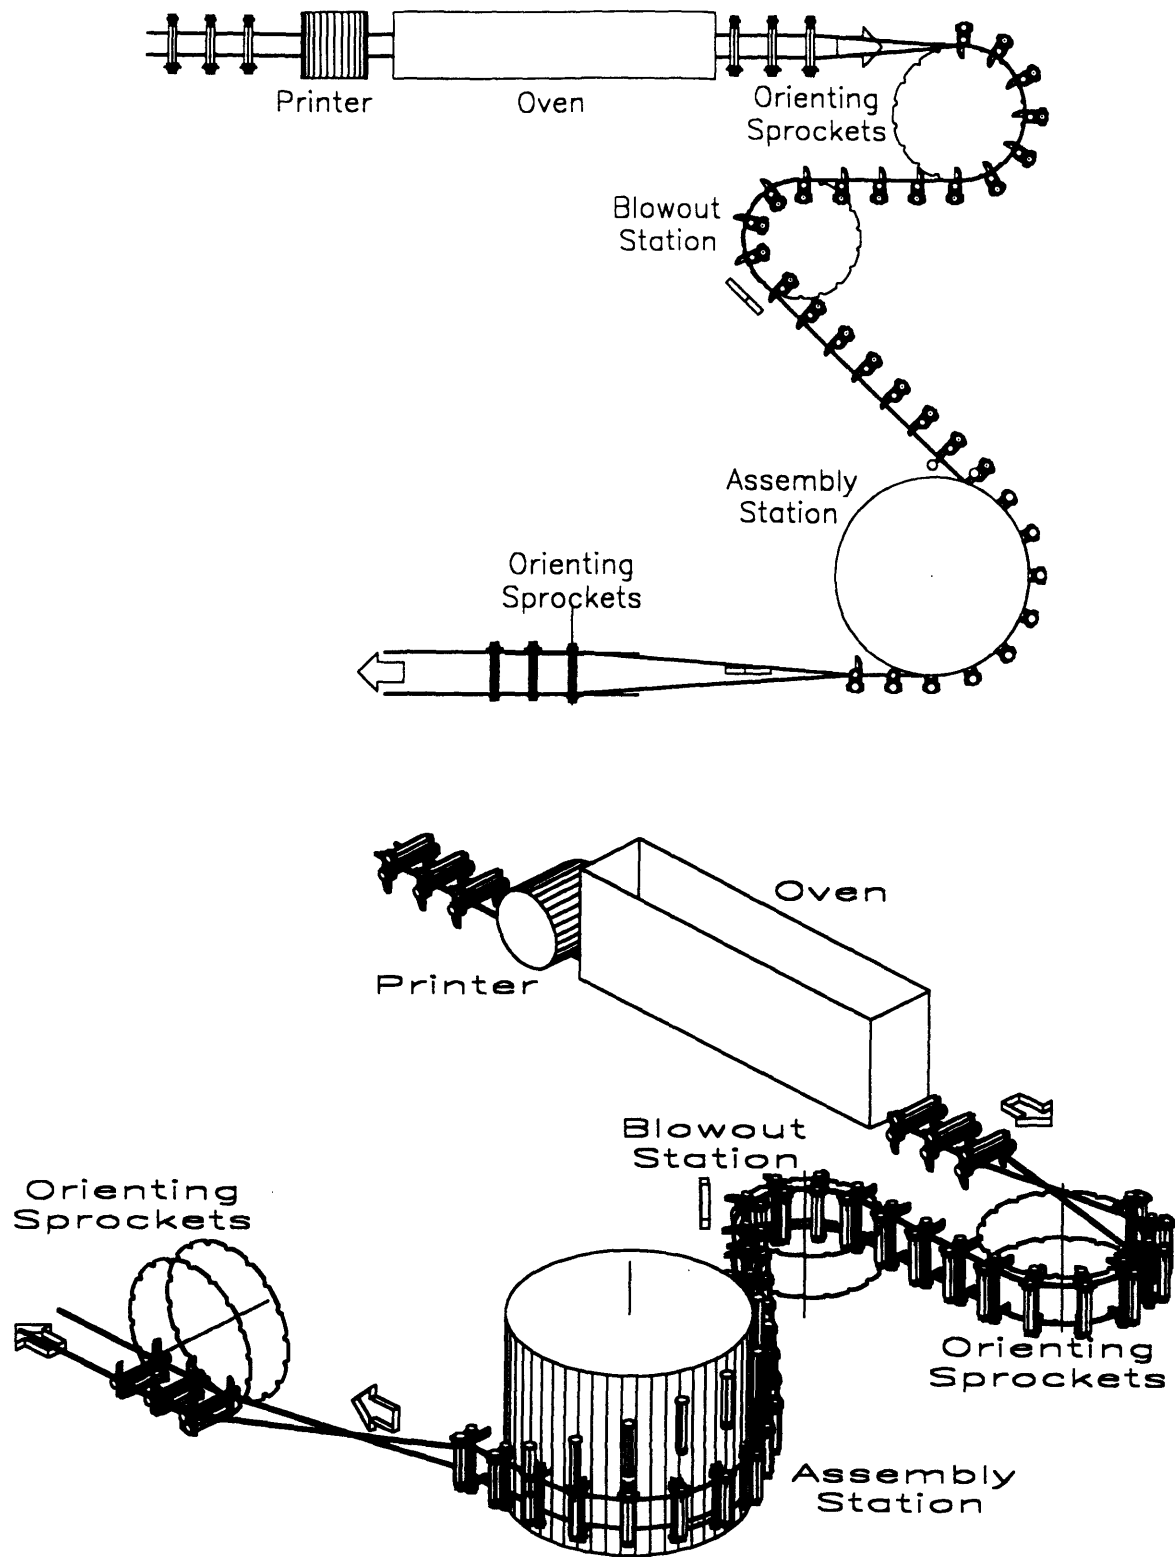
Possible plant layout incorporating the cable/carrier mechanism.
